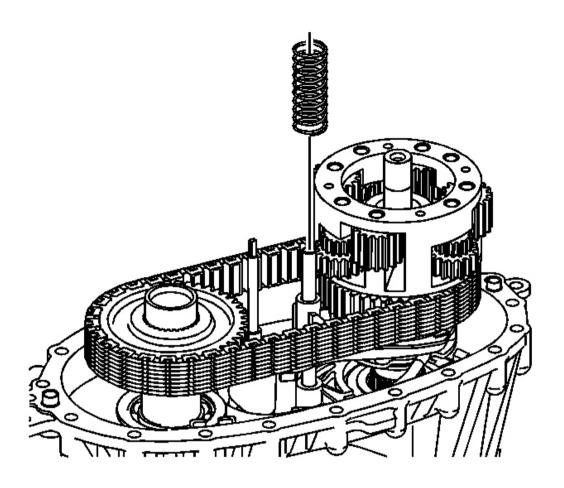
Identifying Shift Fork Shaft Spring Courtesy of GENERAL MOTORS CORP.
